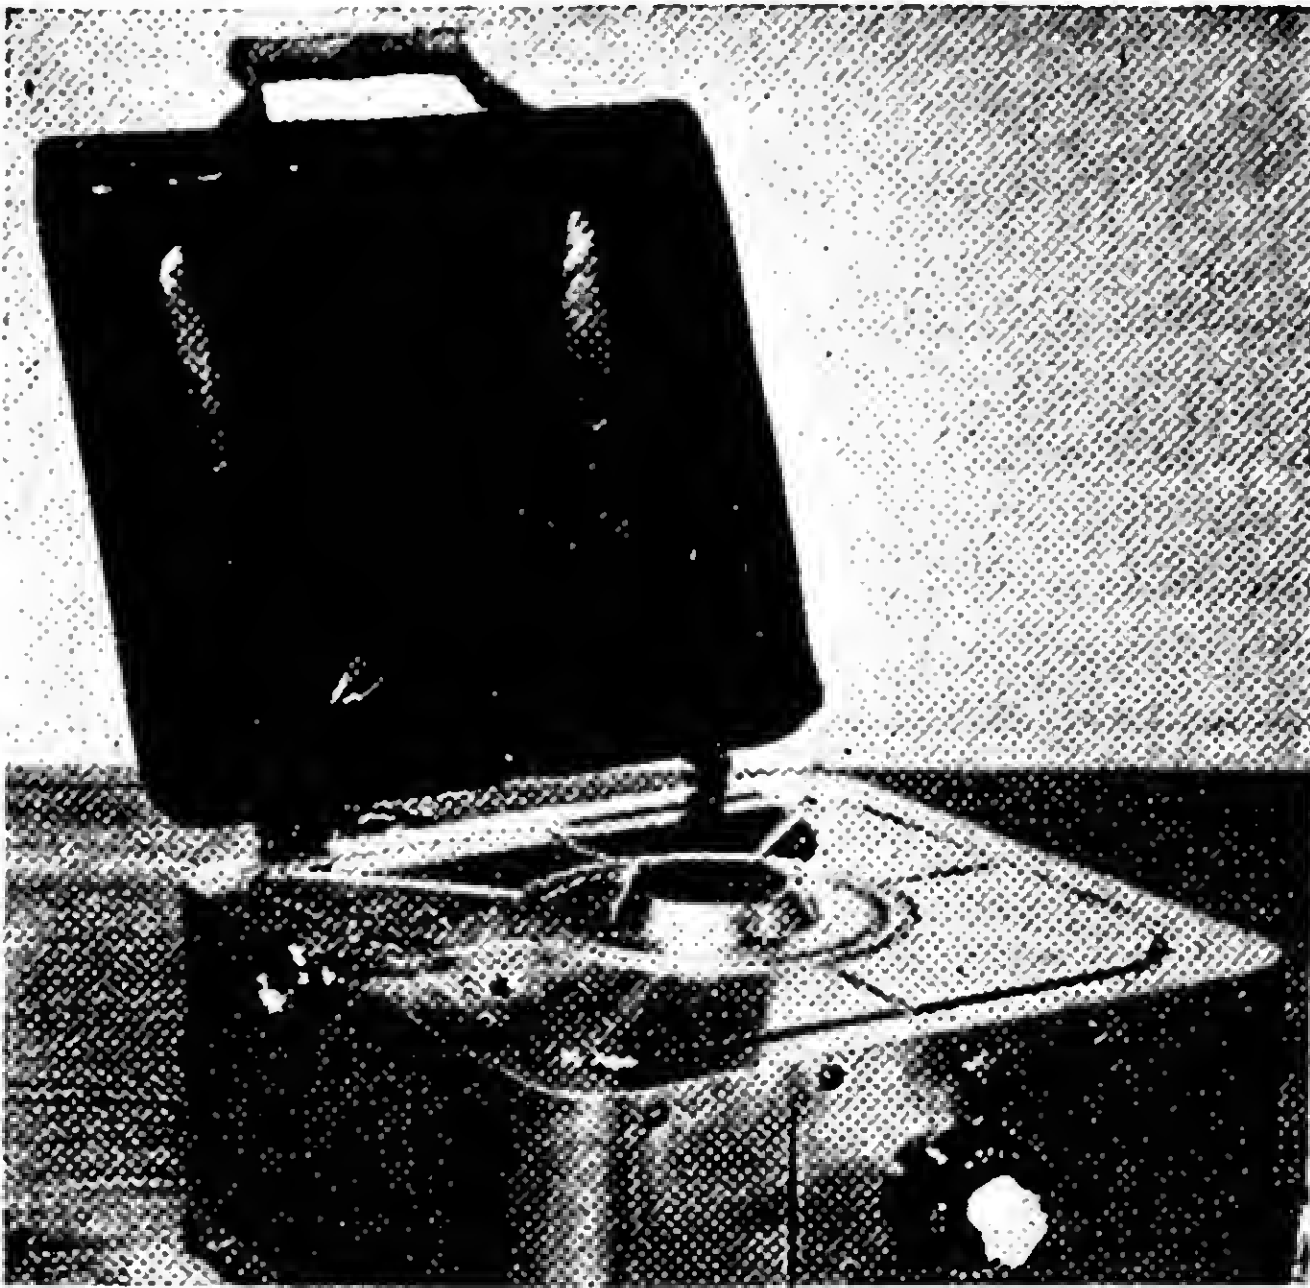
Self-sealing curing fixture to mold an ash tray. Note sponge rubber gaskets on the lid. Outer gasket is continuous for sealing. Inner gasket is discontinuous. Flexible rubber blanket is attached to the lid.
